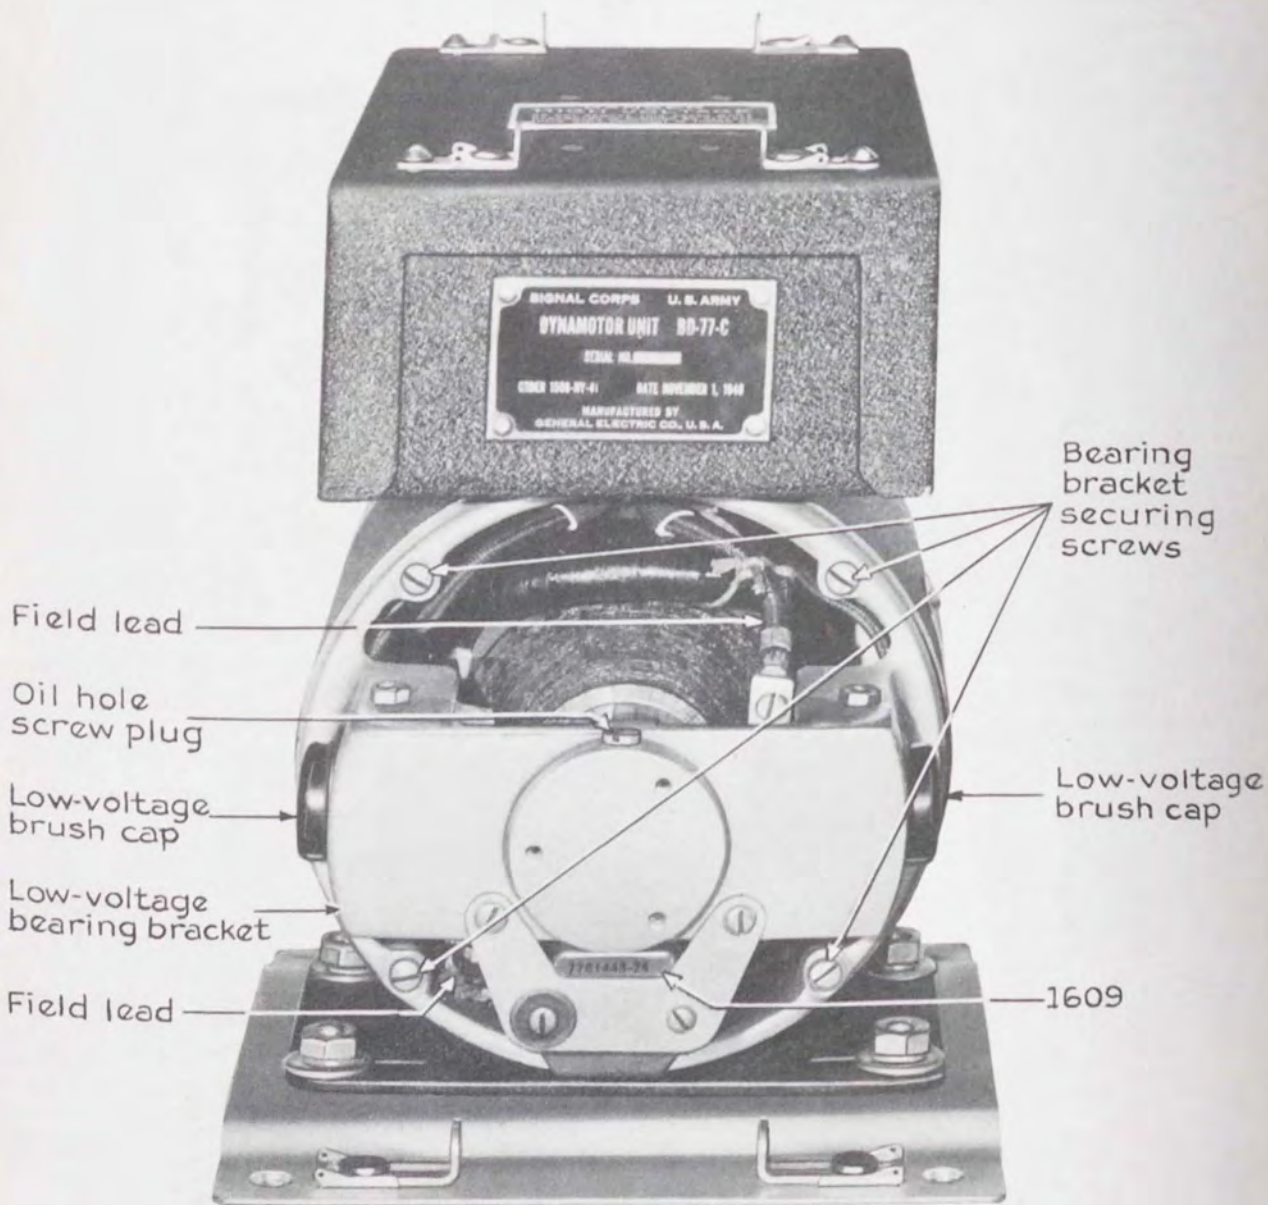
DYNAMOTOR UNIT BD-77-C, MOUNTING FT-107 AND LOW-VOLTAGE END BELL REMOVED
